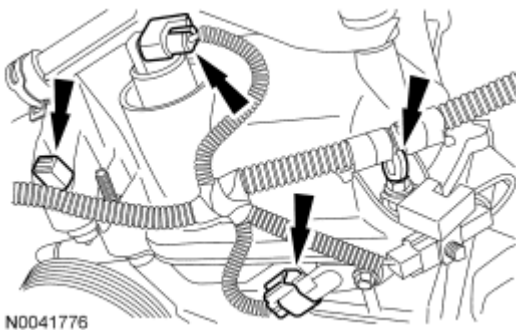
Locating RH VCT Solenoid And LH Camshaft Position Sensor Electrical Connectors
